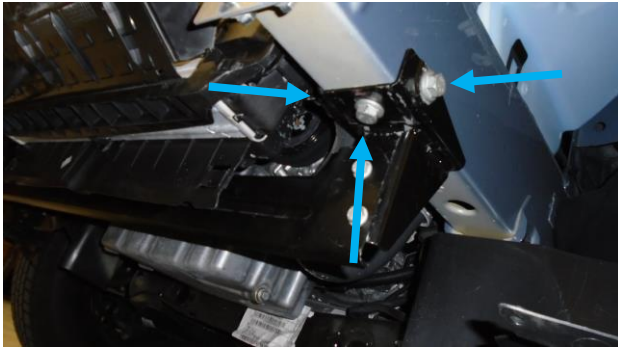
Engine Crossmember Bracket Factory Bolts (Driver Side Shown)
